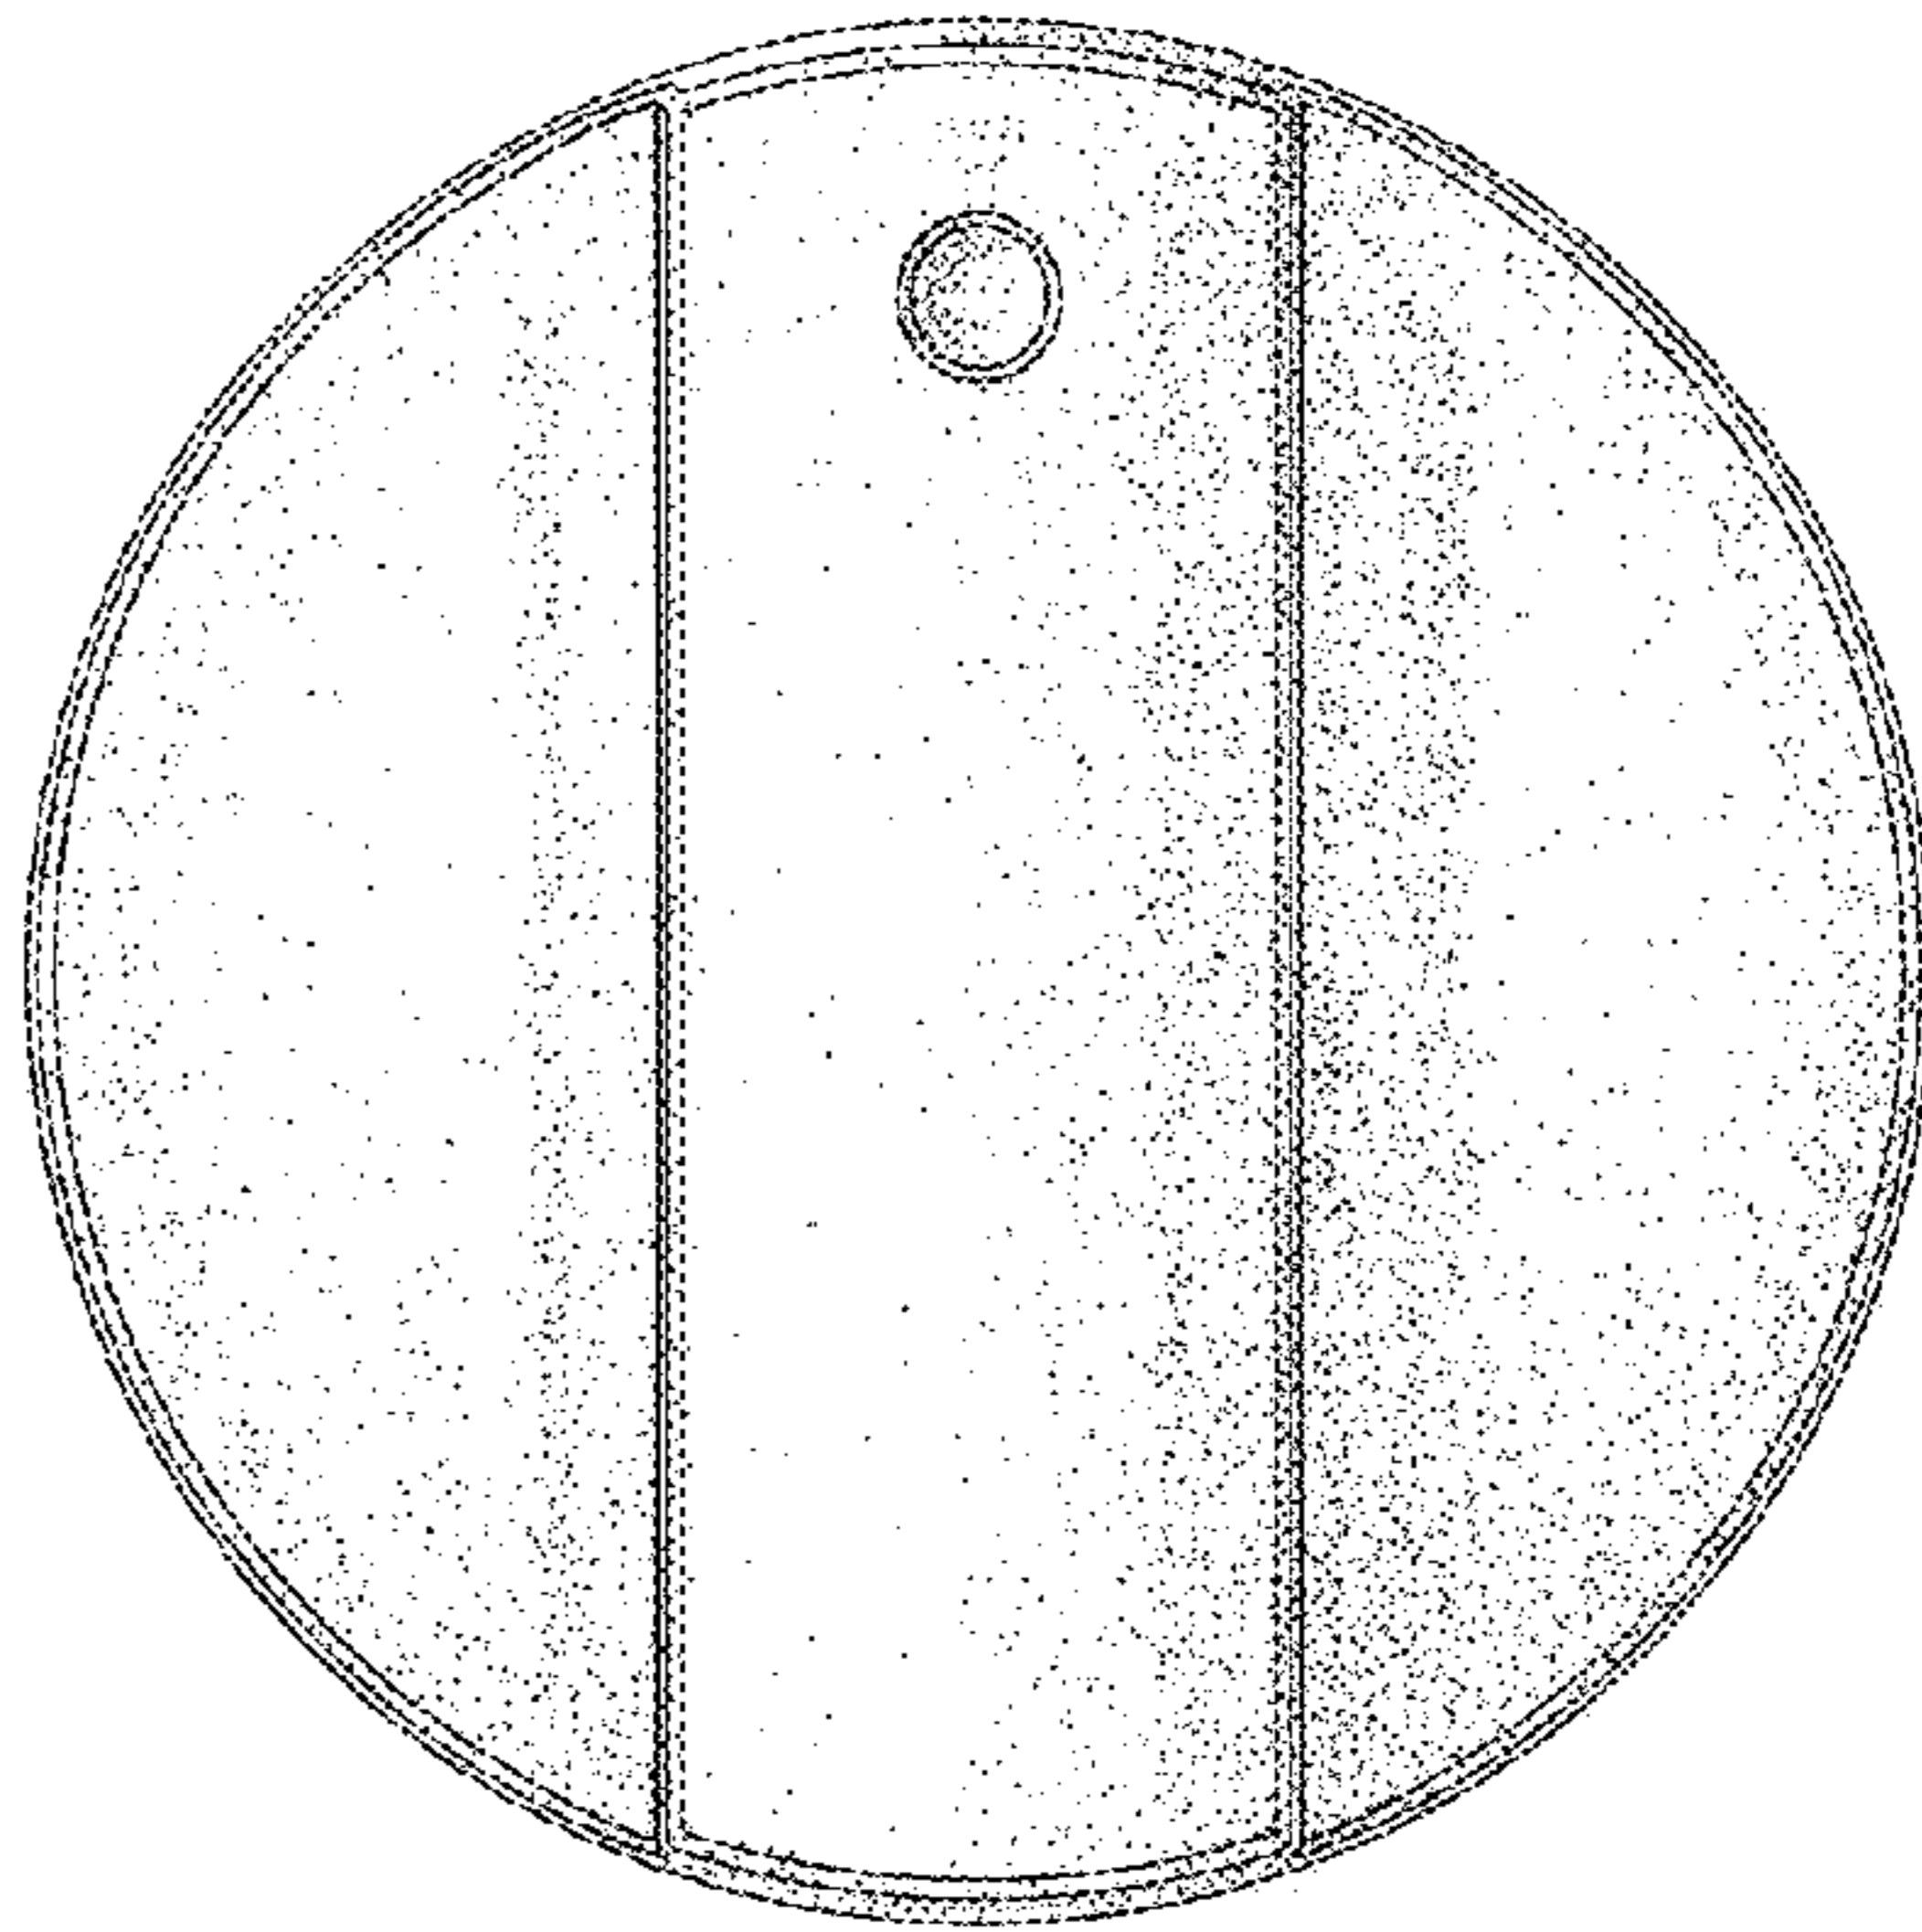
is a front perspective view of one embodiment of a bladed knob of the present invention;
